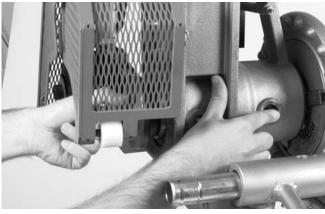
Engaging Lock Pin and Removing Drive Roll
